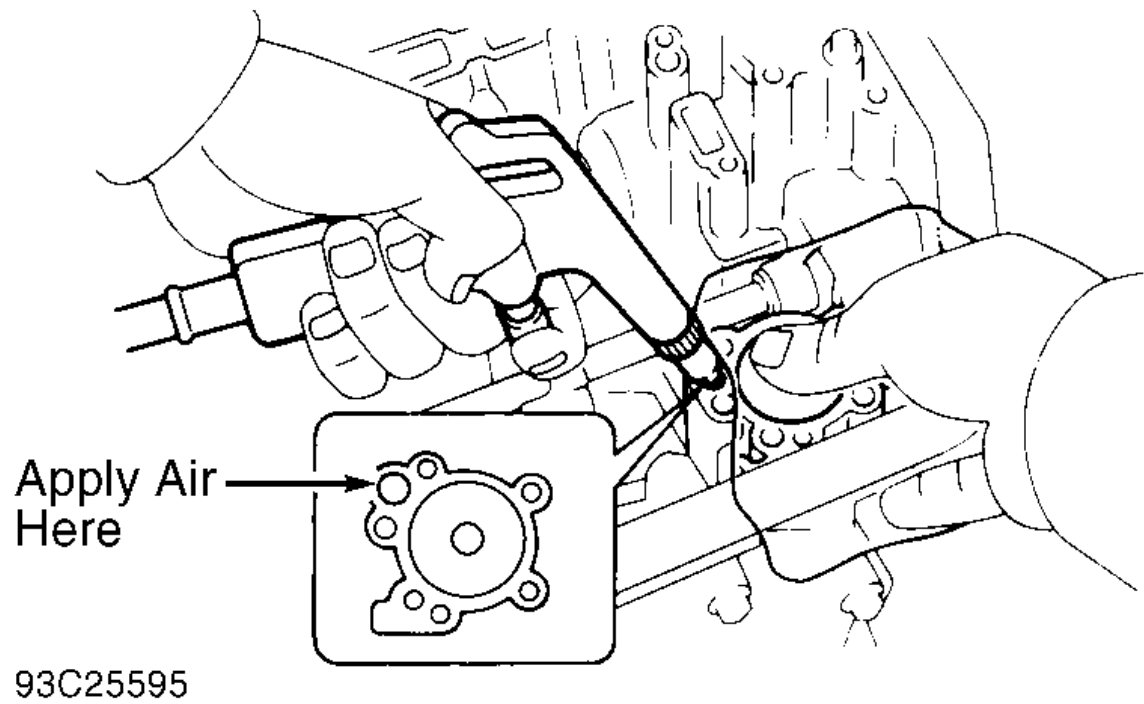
Removing Underdrive Clutch Accumulator Piston & Spring
